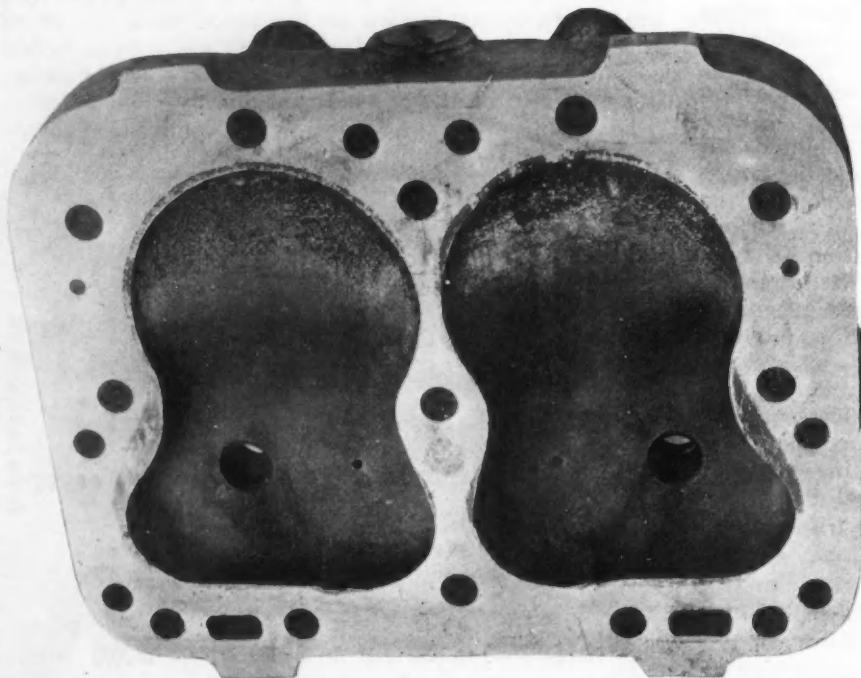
PHOTOGRAPH OF AN ALUMINUM COMBUSTION-CHAMBER HEAD SHOWING FLAME QUENCHING AND FUEL WASTE DUE TO OVERCOOLING
